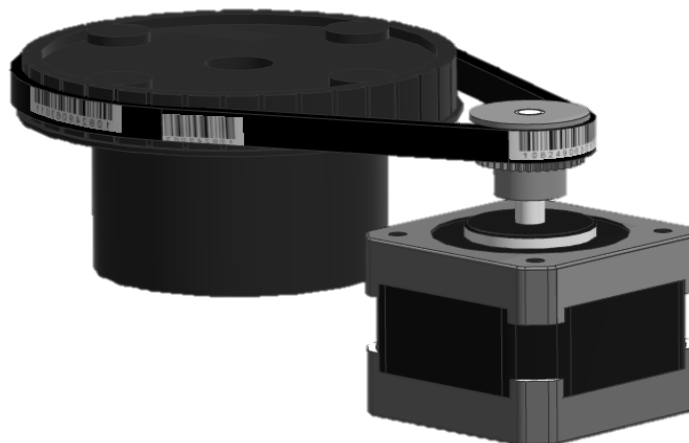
Belted connection of stepper motor and big pulley of the vertical rotation. mechanism.
